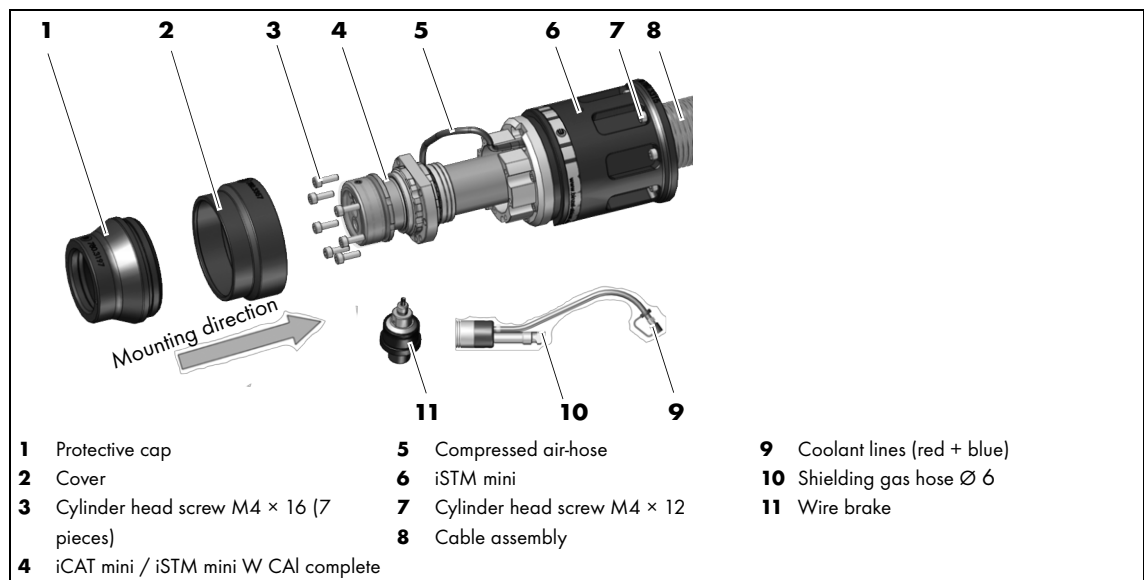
Mounting the cable assembly iSTM mini for ABIROB® W with Wire brake
